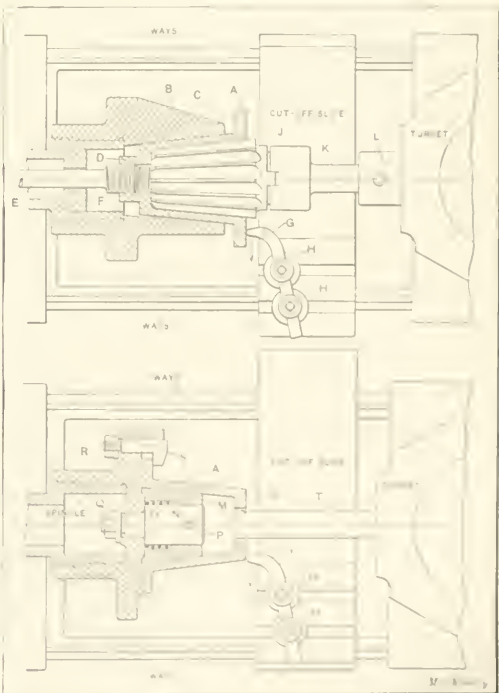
Fixture for holding Tapered Hub Casting while finishing Inside Surface and facing Ends
